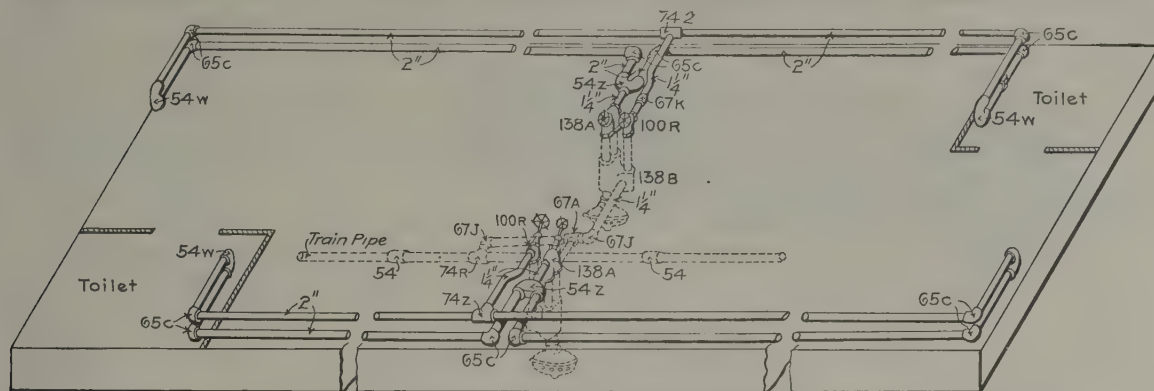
Arrangement of Piping for Standard Direct Steam System with Two Traps No. 138.
